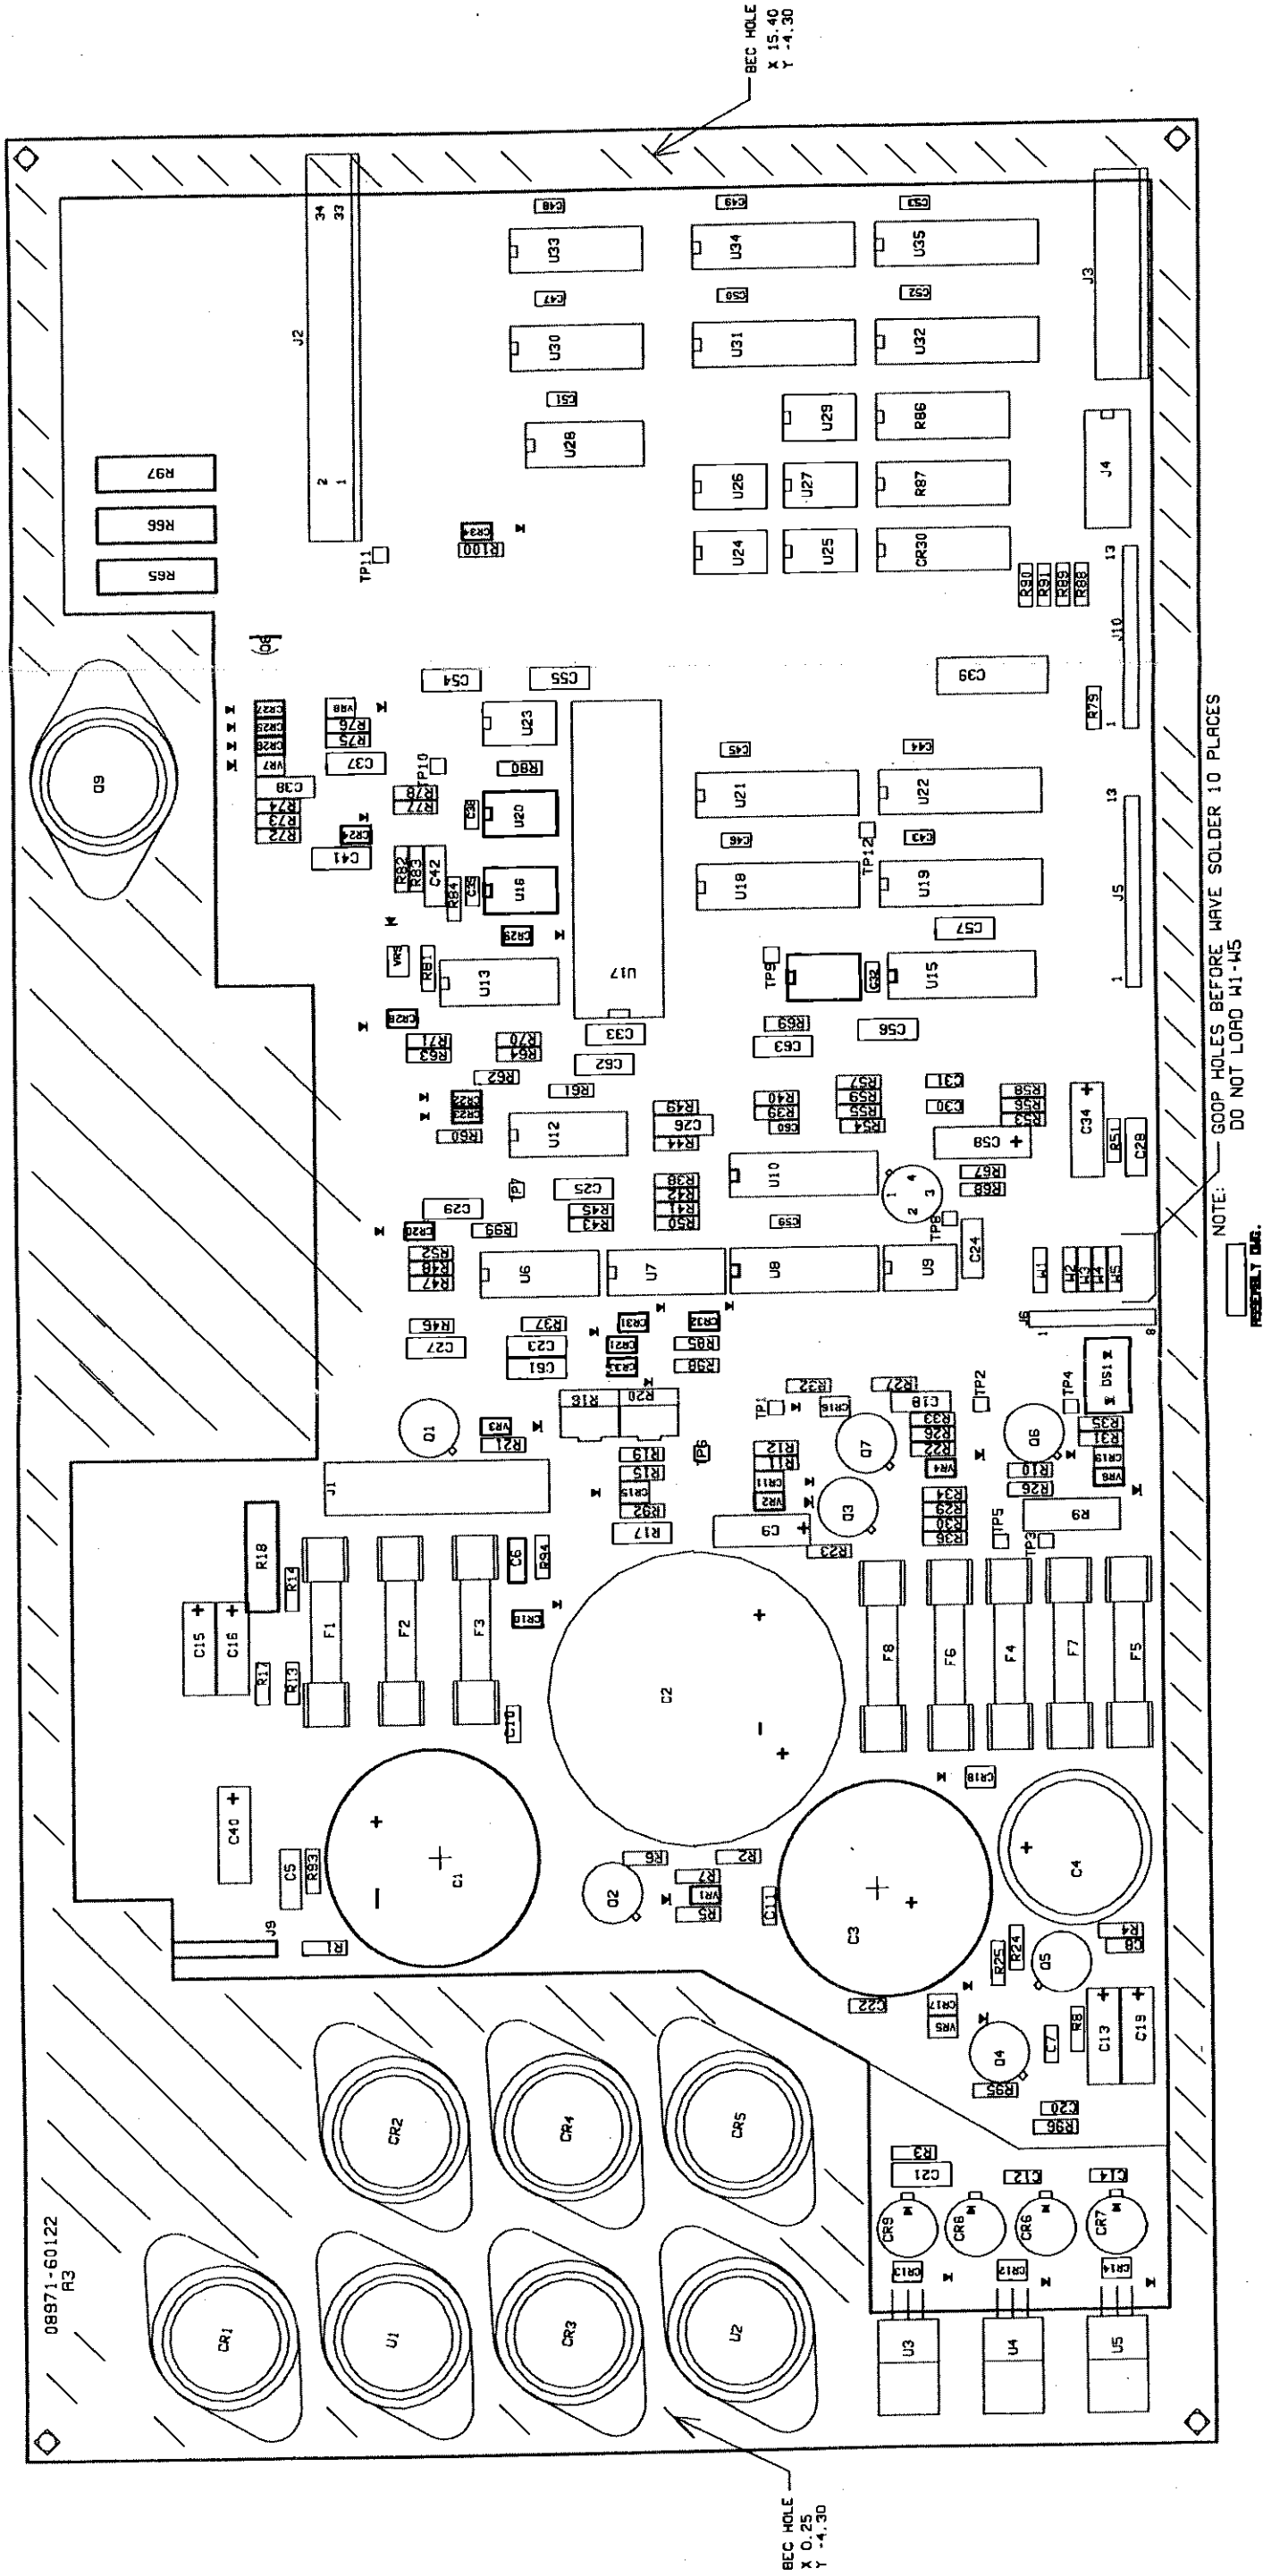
A3a Power Supply/Driver Assembly Component Locations 8-85/8-86
